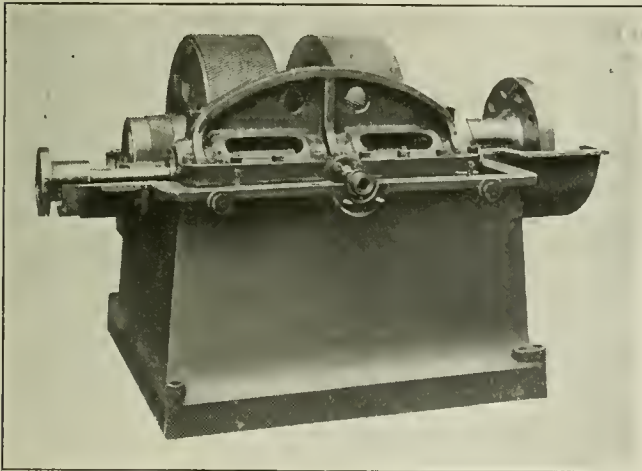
FLEXIBLE-FRAME GEAR WITH COVER REMOVED
